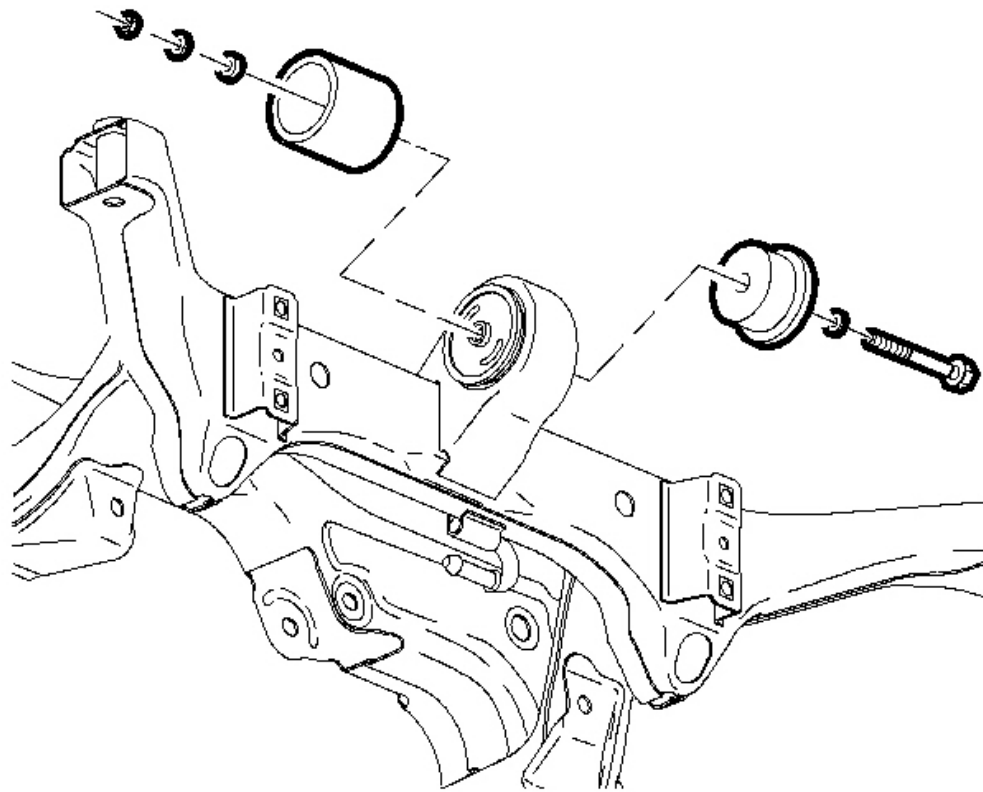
Installing Bolt & Washer Through The Driver, Bushing, & Receiver
